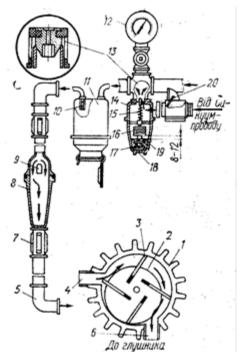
Vacuum installations UVU-60/45[1] 1 - pump housing; 2 - rotor; C - scoop; 4 - inlet pipe; 5 - knee; 6 - outlet; 7 - coupling; 8 - fuse; 9 - return valve; 10 - valve-float; 11 - vacuum cylinder; 12 - vacuum gauge; 13 - valve regulator; 14 - vakuumrehulyatora body; 15 - spring; 16 - weight; 17 - dampened drive; 18 - glass; 19 - oil; 20 - LED costs.
